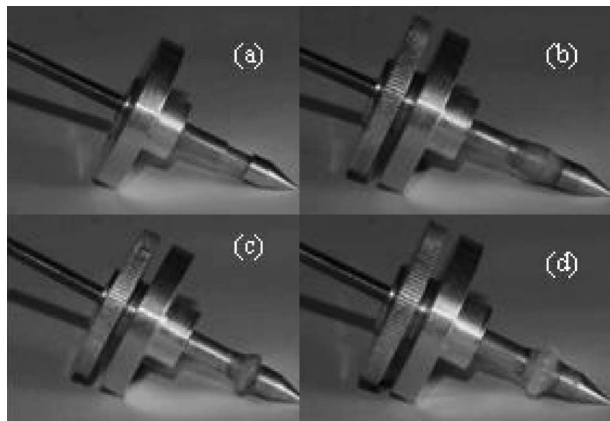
Sock expansion and pull test jig: (a) empty, (b) sock with no slit, (c) sock without slit fold over failure, and (d) four slits open
